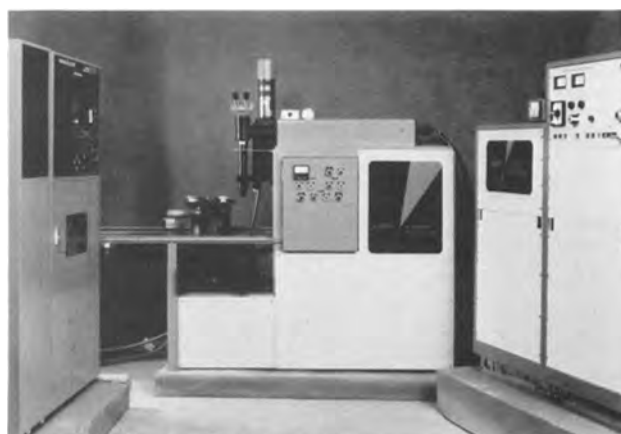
NC-controlled laser welding system. Courtesy: Mr. L. Derose, EBTEC Corporation.
